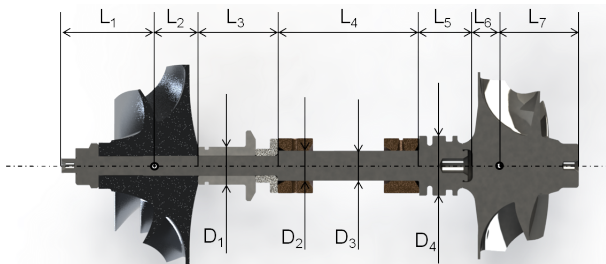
Cross-sectional view of the turbocharger rotor with the main rotor dimensions.
